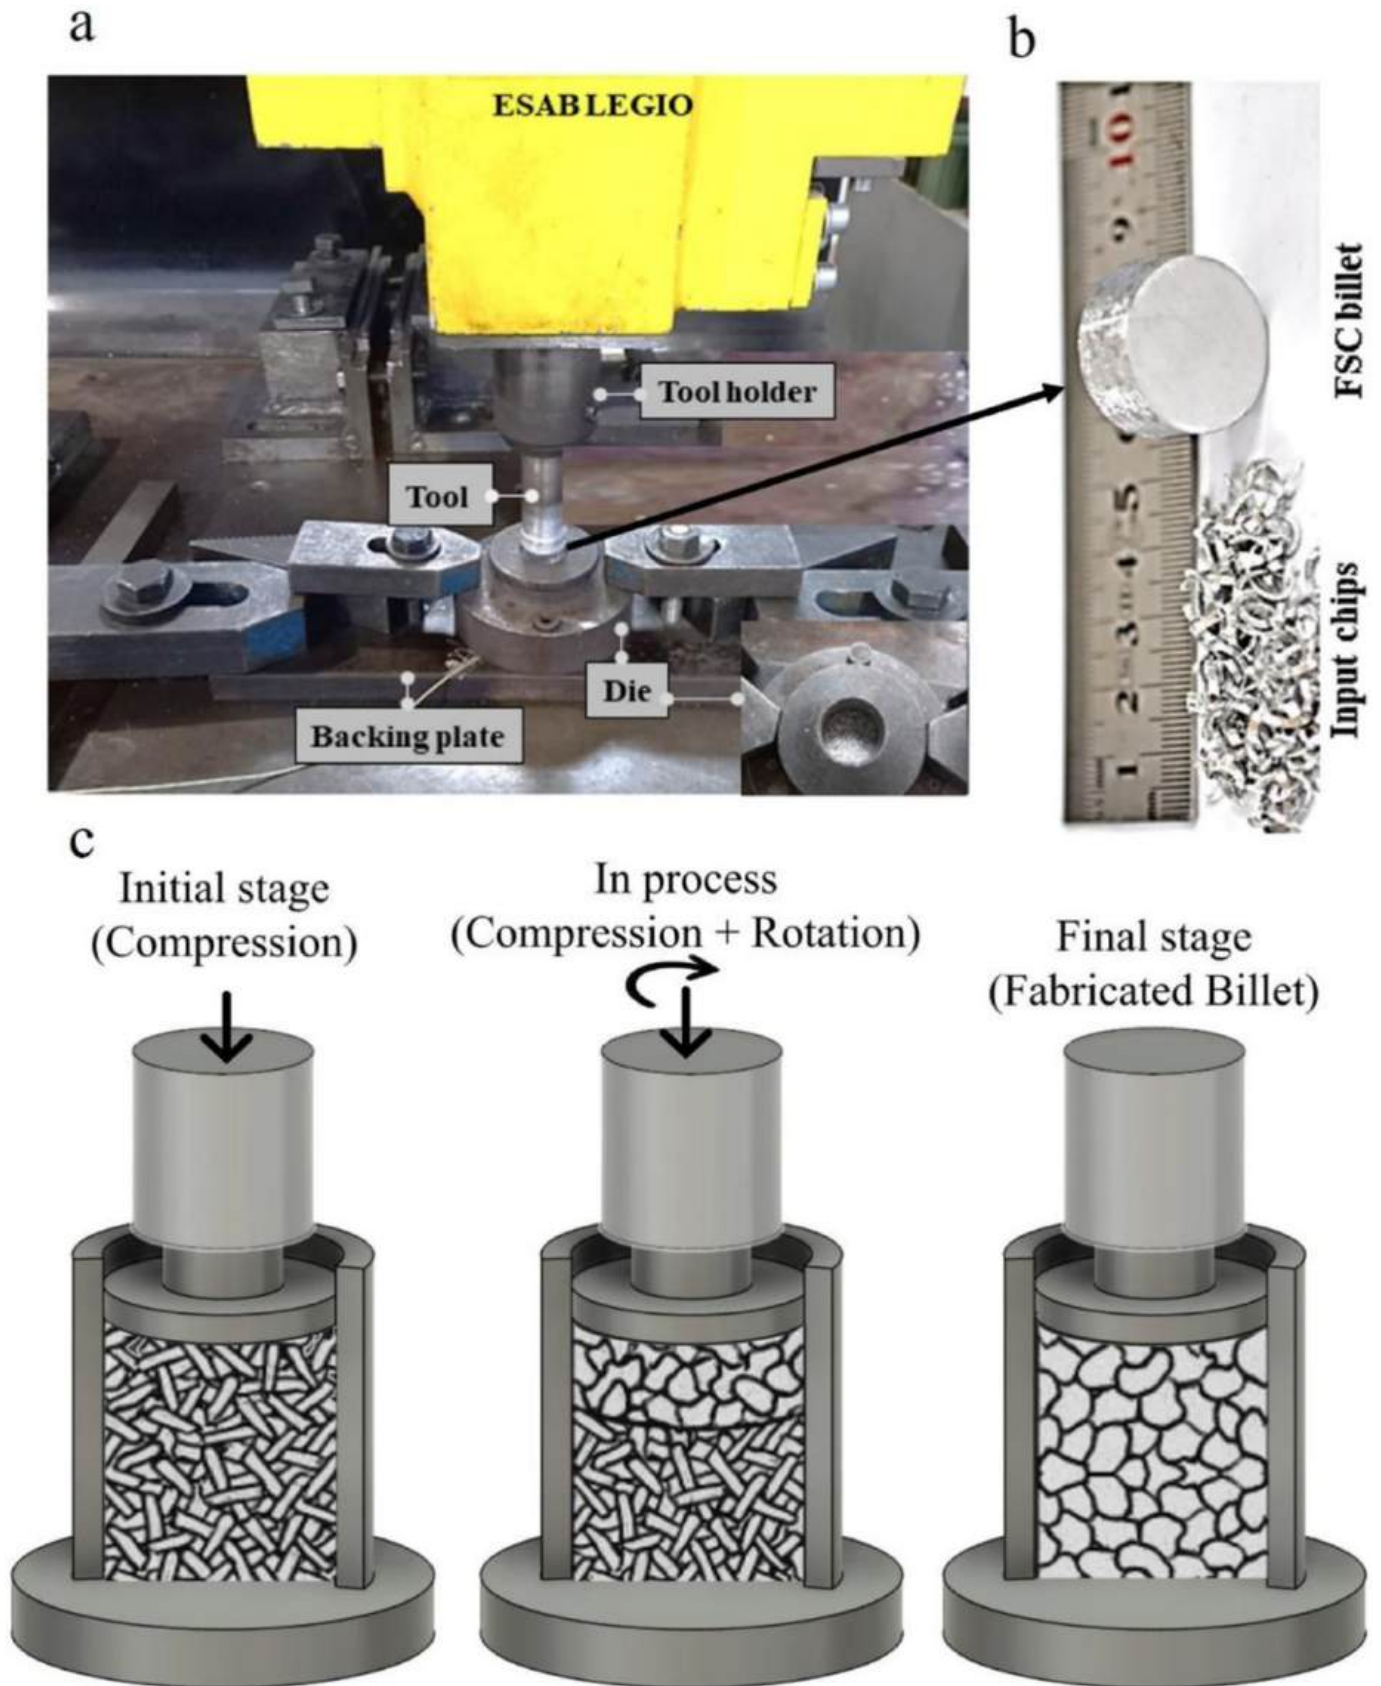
Friction stir consolidation: a) experimental setup, b) input chips with consolidated billet, and c) process schematic showing the steps of billet fabrication.
